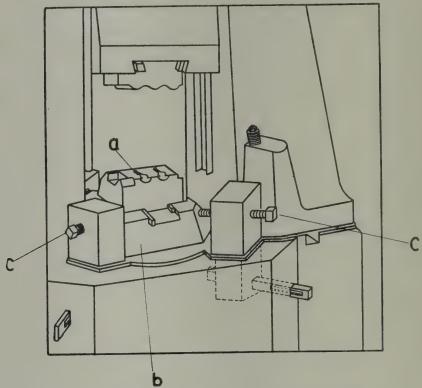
FASTENING OF THE DIE TO THE ANVIL BLOCK OF THE HAMMER BY DIE HOLDER AND FOUR POPPETT SCREWS: (a) Lower Die-holder; (b) Anvil Block; (c) Poppett screws
